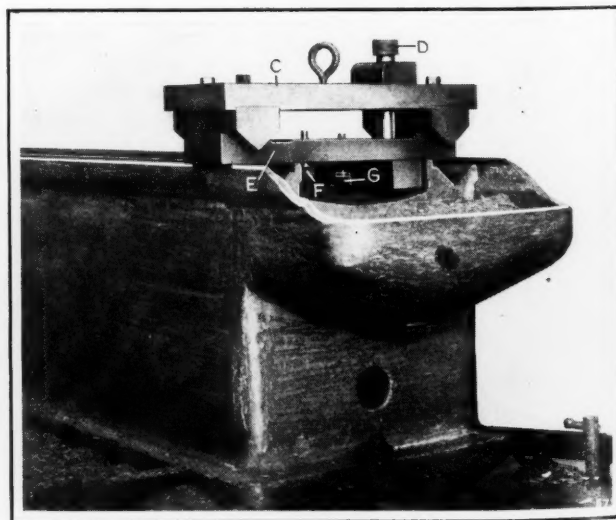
Bed Gaging Fixture used in Connection with Table Gaging Fixture for checking Inner Guides of Table
